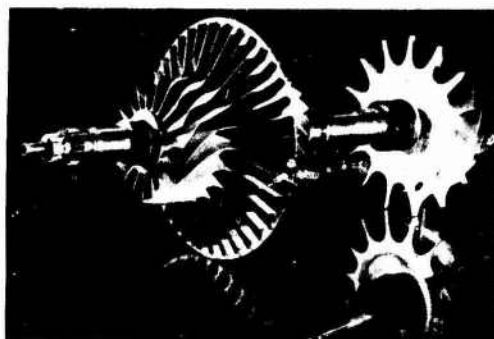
Single-Stage Double-Sided Centrifugal Compressor (foreground) and Radial-Inflow Gas-Producer Turbine (right)
